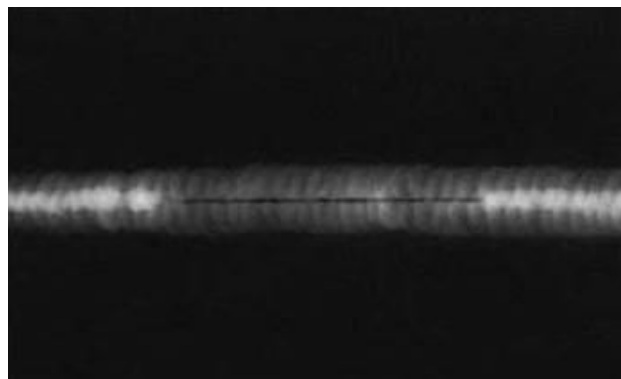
Input Image with Lack of Penetration Welding Defect
